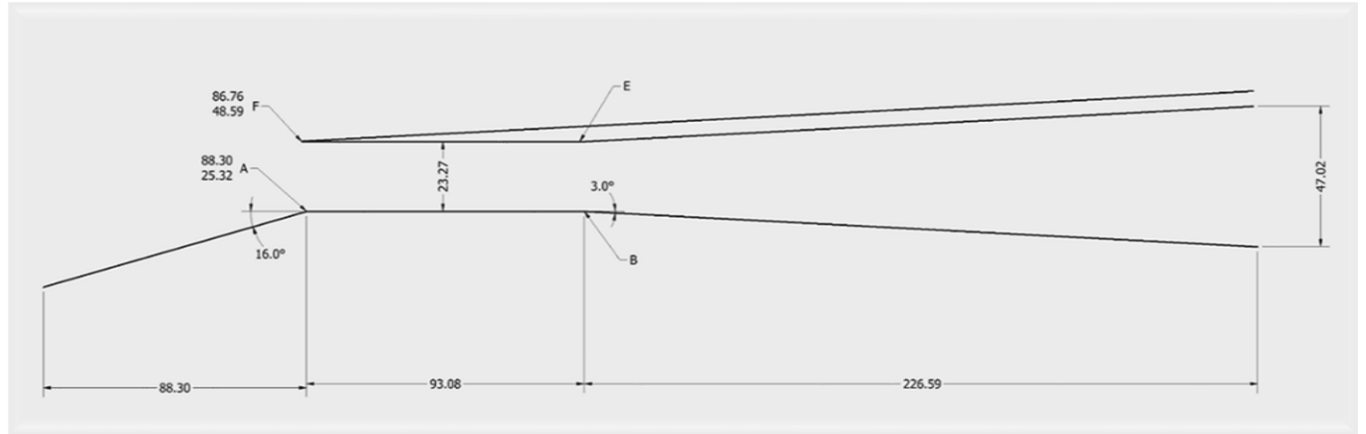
Intake of a two-dimensional image with dimensions(mm)
